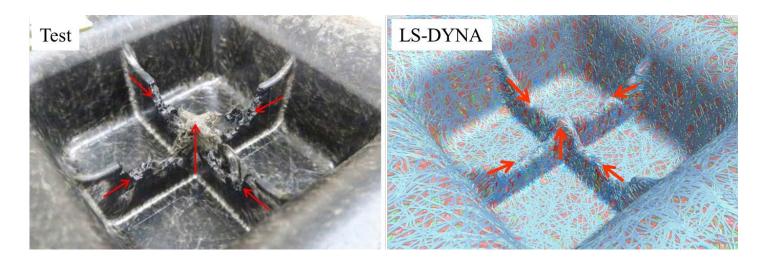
Formation of ribs and weld lines near the final punch stroke
